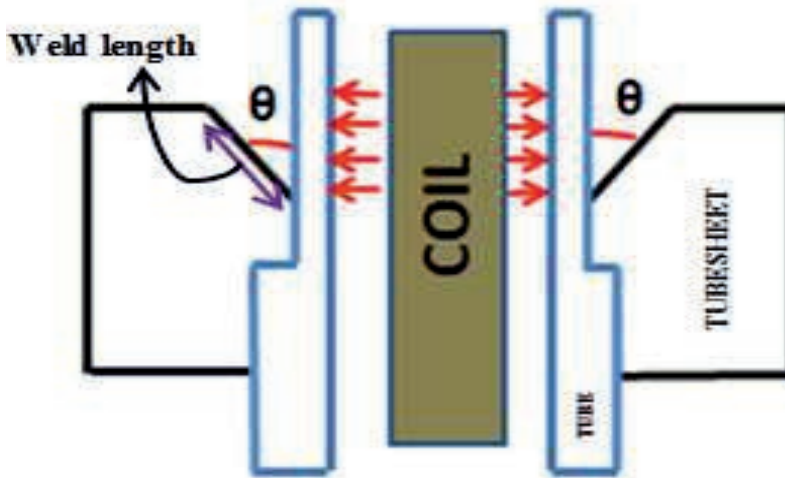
Schematic view of coil-job placement with impact angle between tube and tube sheet.
